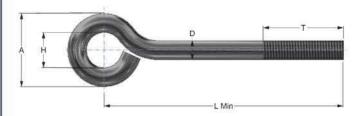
ER (Un-Welded) & 3ERW (Welded) – Eye Rod
